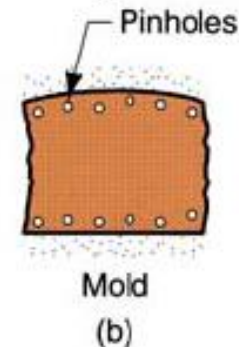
Common defects in sand castings: (b) pin holes
